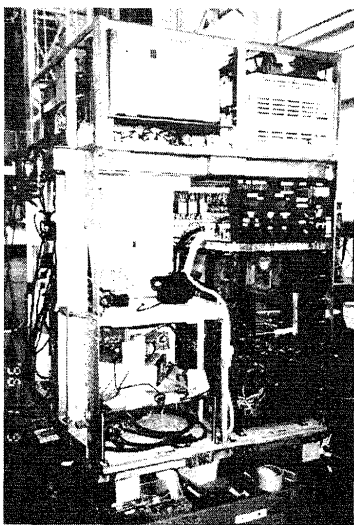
Gas tungsten arc welding apparatus for use in microgravity environment. 1: welding power source, 2: welding chamber, 3: battery, 4: welding control system, 5: video tape recorder
